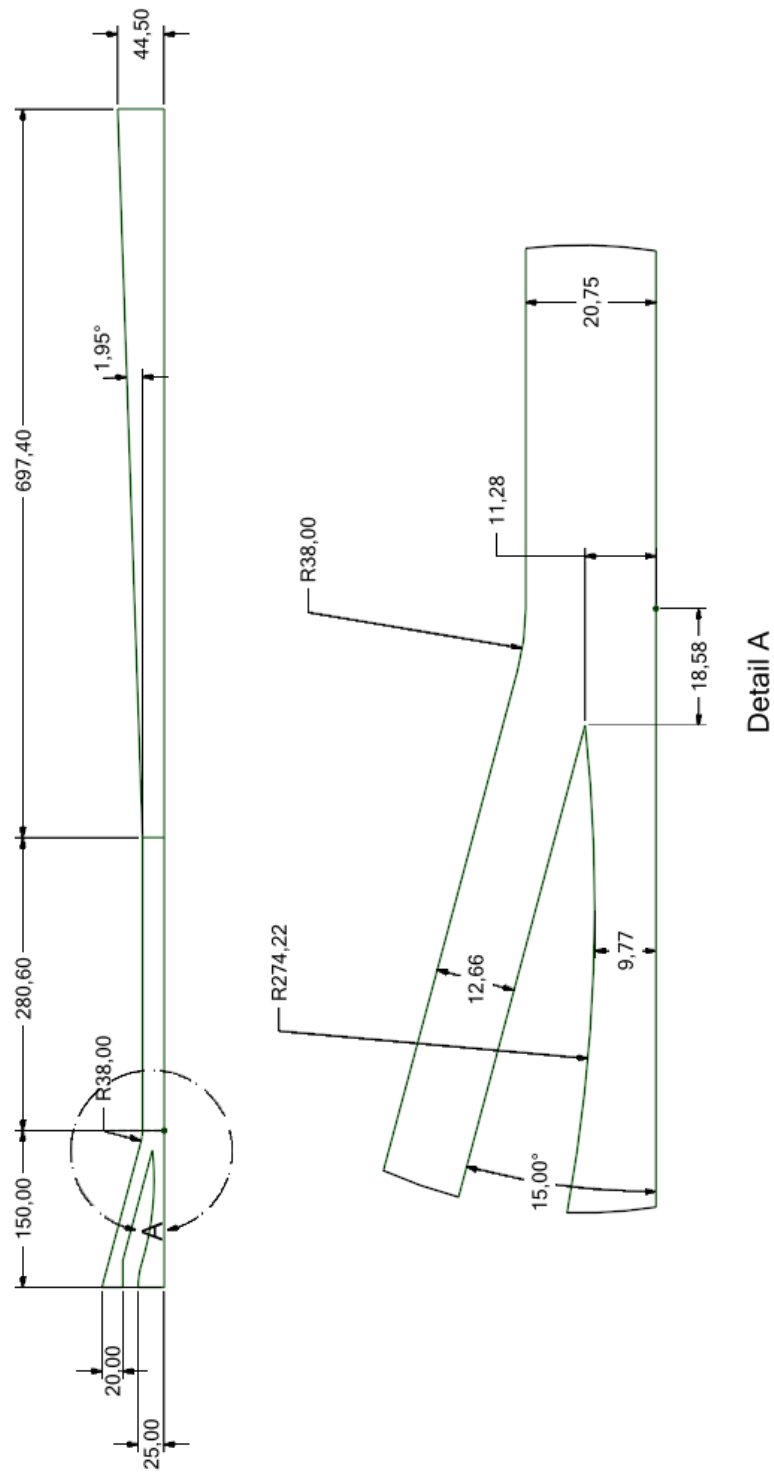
Dimensioned drawing of the axisymmetric ejector used throughout the manuscript. All dimensions are in mm.
